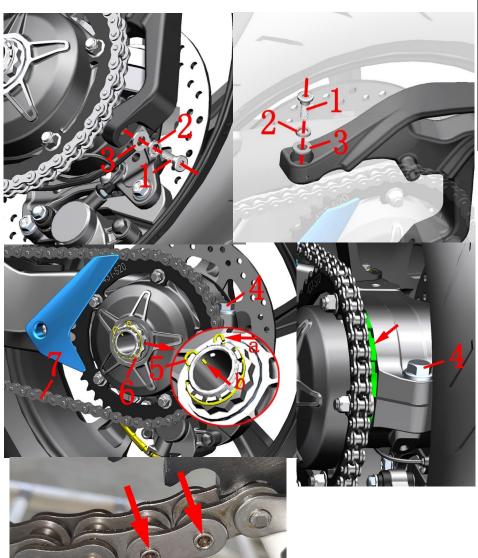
REAR WHELL COMPONENT		Sprocket assembly 1	CHK
